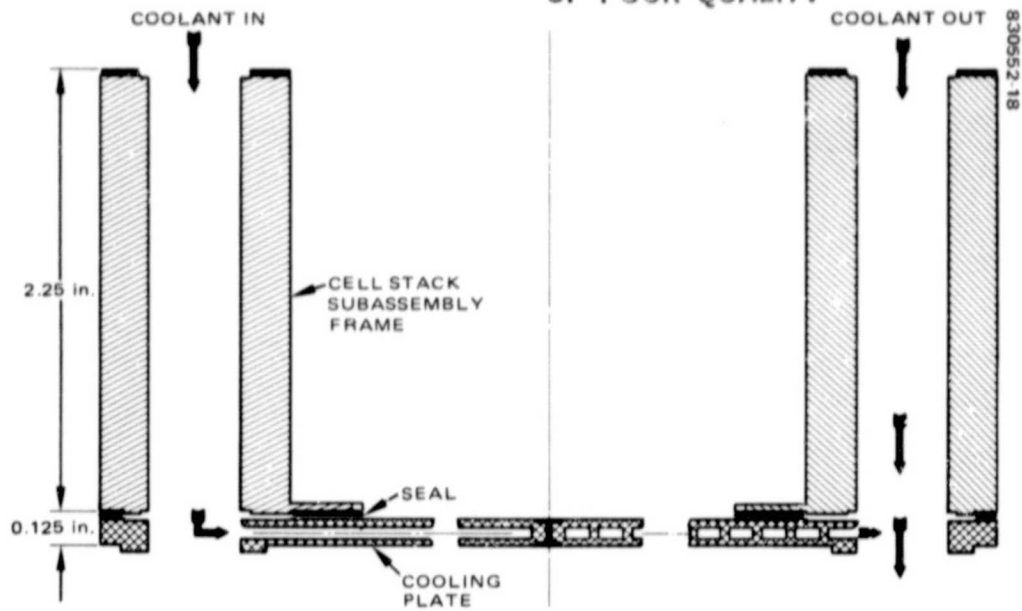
COOLING PLATE FRAME ASSEMBLY
